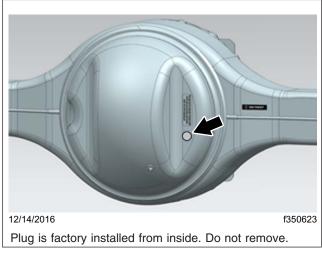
, Non-Removable Plug on the Back of Rear Axle Housing (axles with ALM system)
